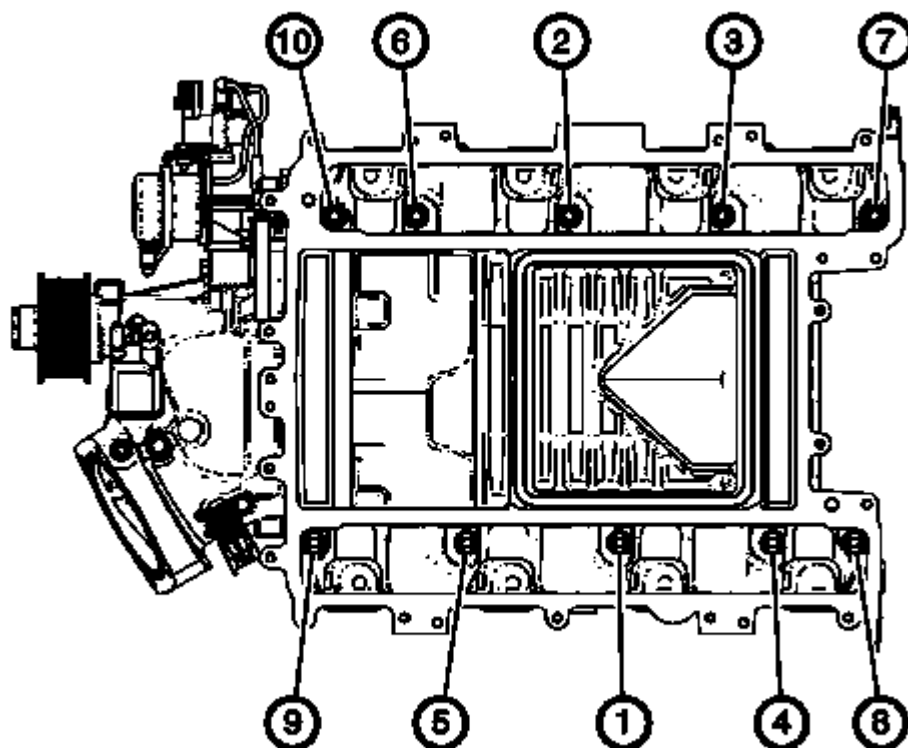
Identifying Supercharger Bolt Tightening Sequence
